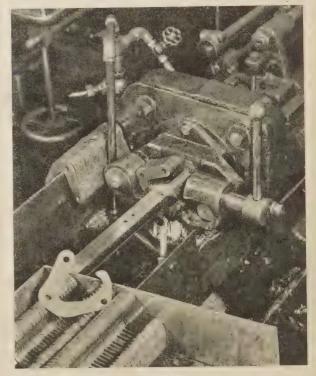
Cutting Gear Teeth or Sector Notches on a Horizontal Hydraulic Broaching Machine, Set Up for Forming the Notches in the Brake-Sector Stamping
